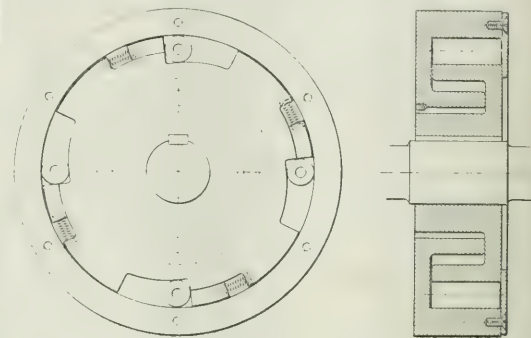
"FREE WHEEL" BRAKE DRUM.
